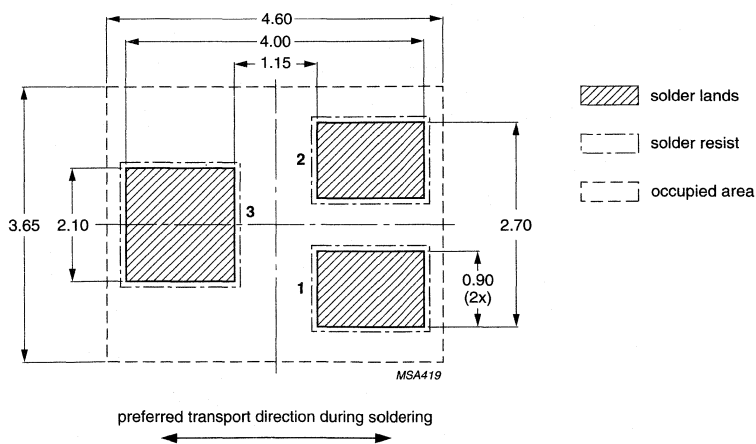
Wave soldering footprint for SOT323 (SC-70).
